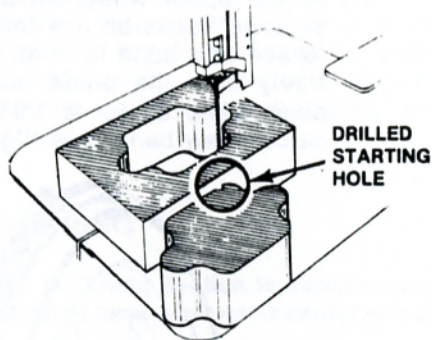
STARTING HOLE FOR SHARP CONTOUR CUTTING.
